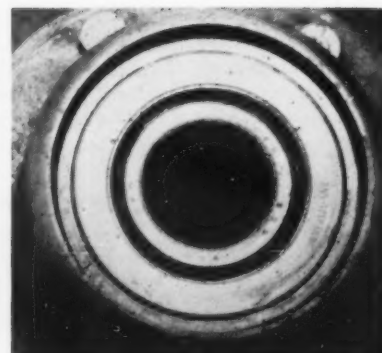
C—Inner Bearing and Seal of Heavy Duty Truck Front Wheel After 40,000 Miles Using Grease A, B, or C.
